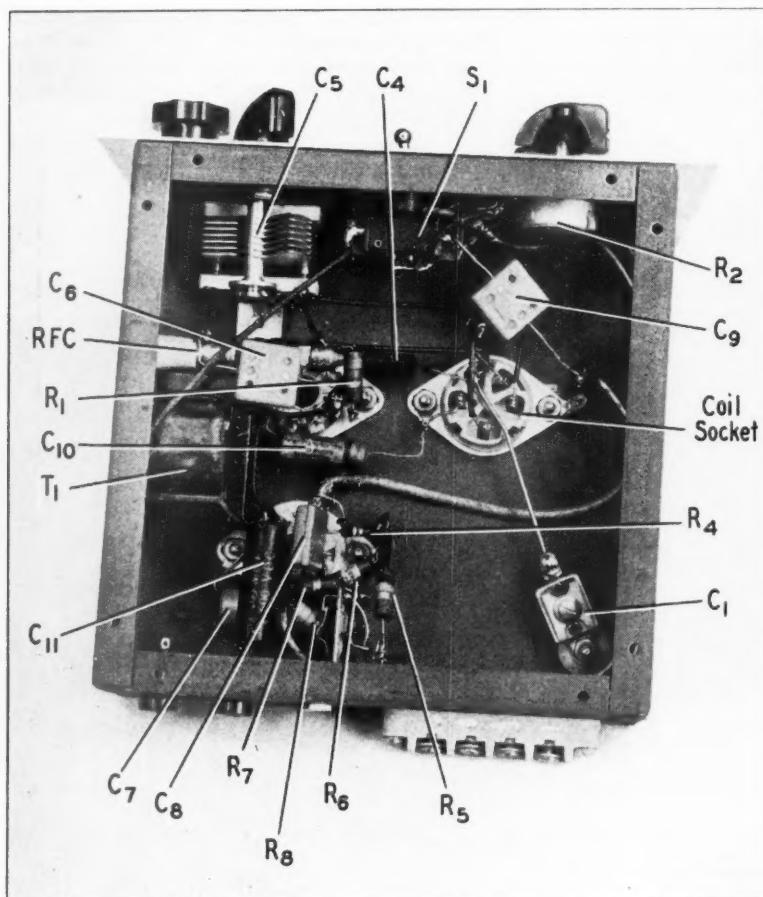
Bottom view of the receiver, showing parts location. Wiring instructions are included in text.
